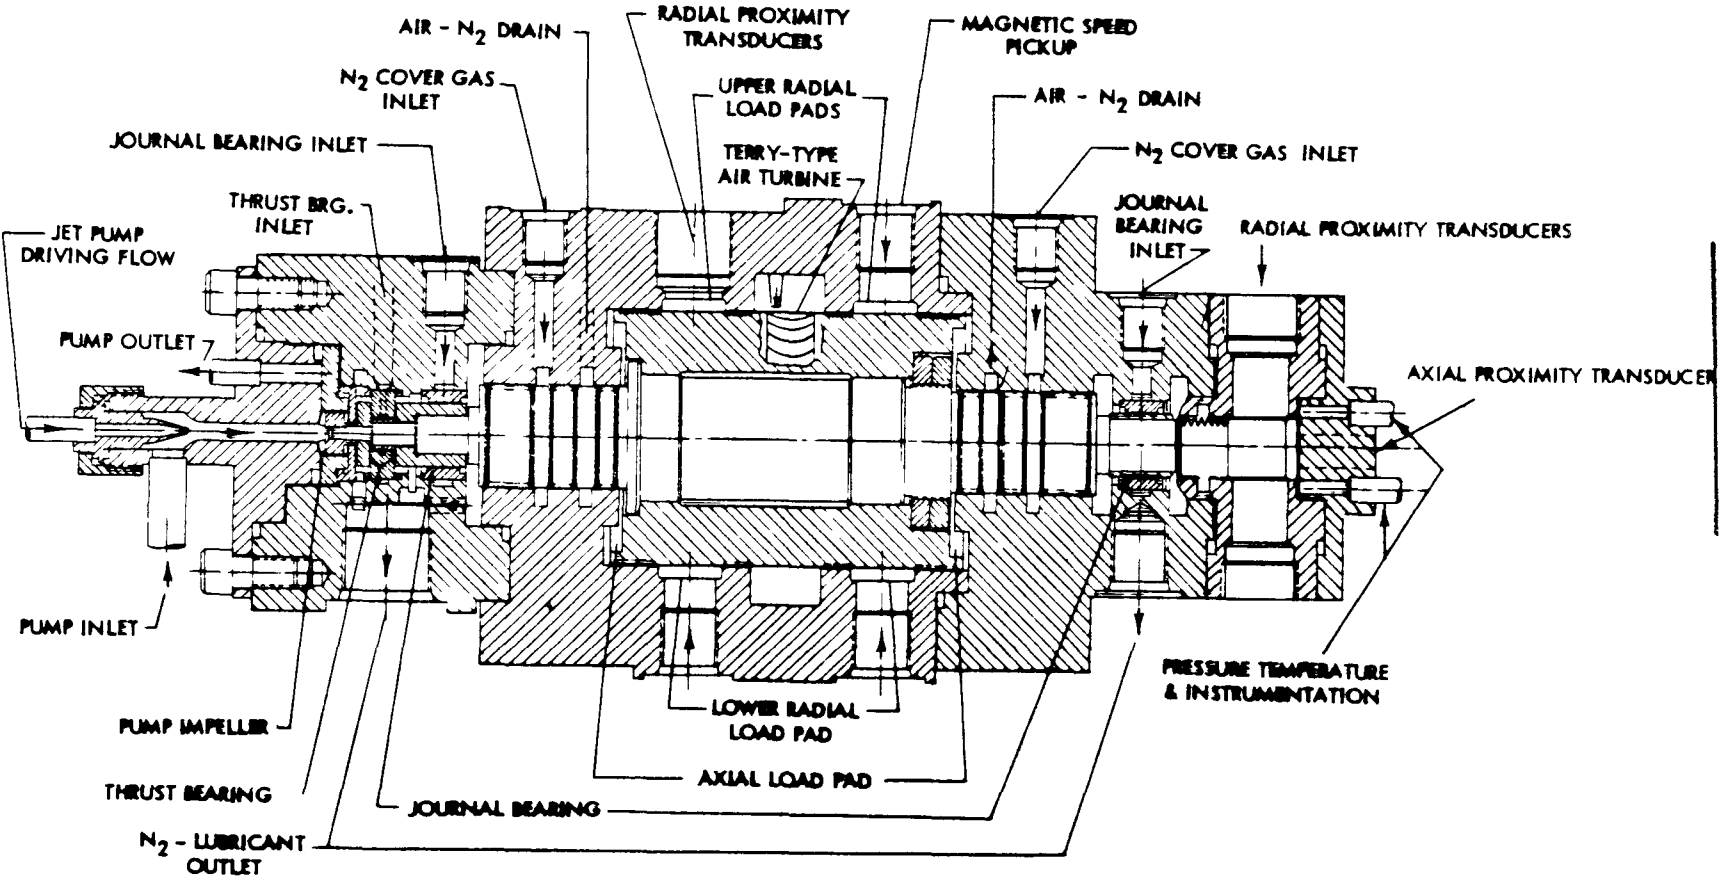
High Temperature Bearing Pump Test Rig Dual Bearing Test Fixture Schematic
